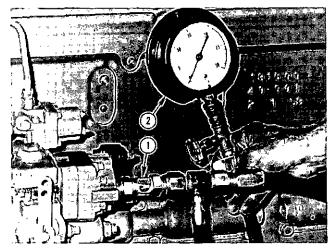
(N11917) Checking fuel filter restriction with ST-434 Vacuum Gauge
